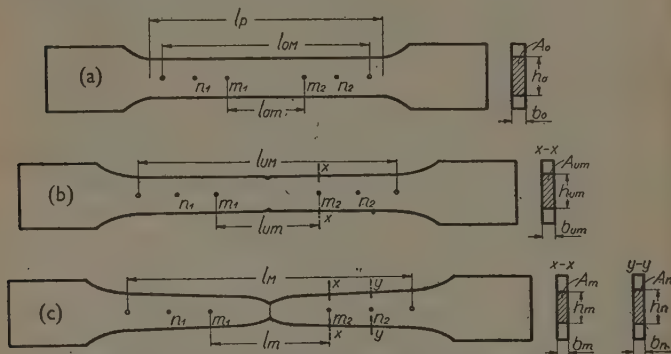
Illustrating the Three Stages of Deformation of a Test-Piece: (a) Initial state; (b) at the moment of reaching the limit of uniform elongation; (c) after fracture.
